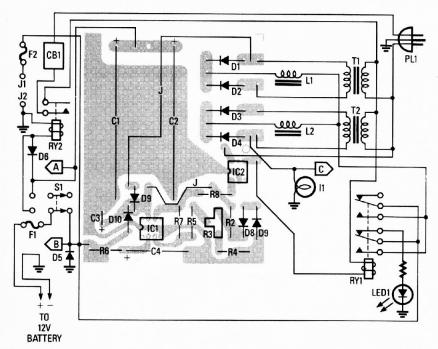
THE PARTS PLACEMENT diagram for the power supply. Make certain that the parallel-wired connections of T1 and T2 are in-phase. Reversed phase will produce zero output.
